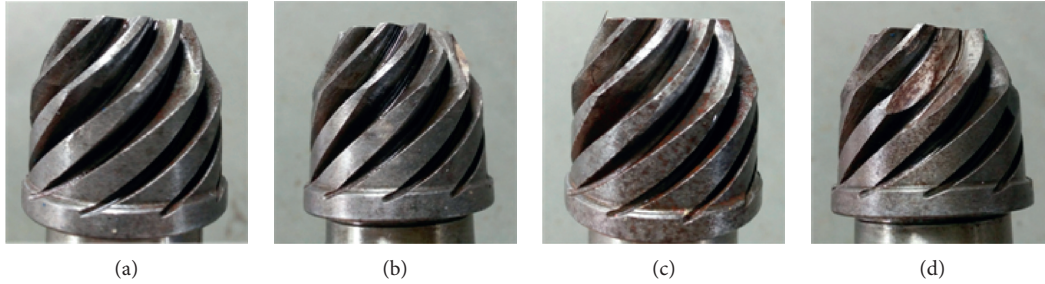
Gear fault parts: (a) normal gear; (b) gear with tooth crack; (c) gear with tooth wear; (d) gear with tooth break.
